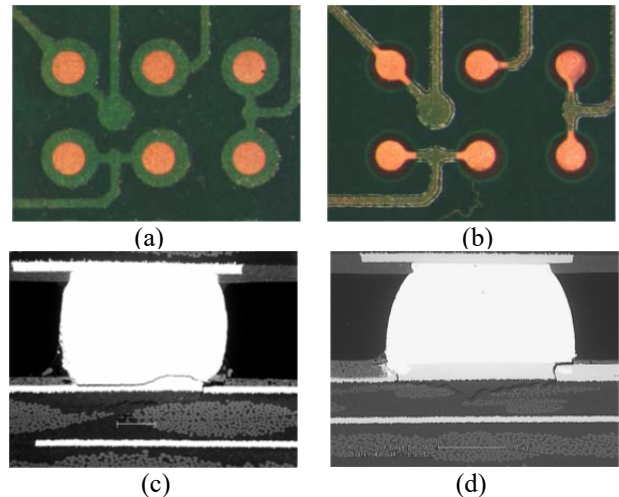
(a) Redesigned test board and (c) its failed joint; (b) previous test board and (d) its failed joint.
